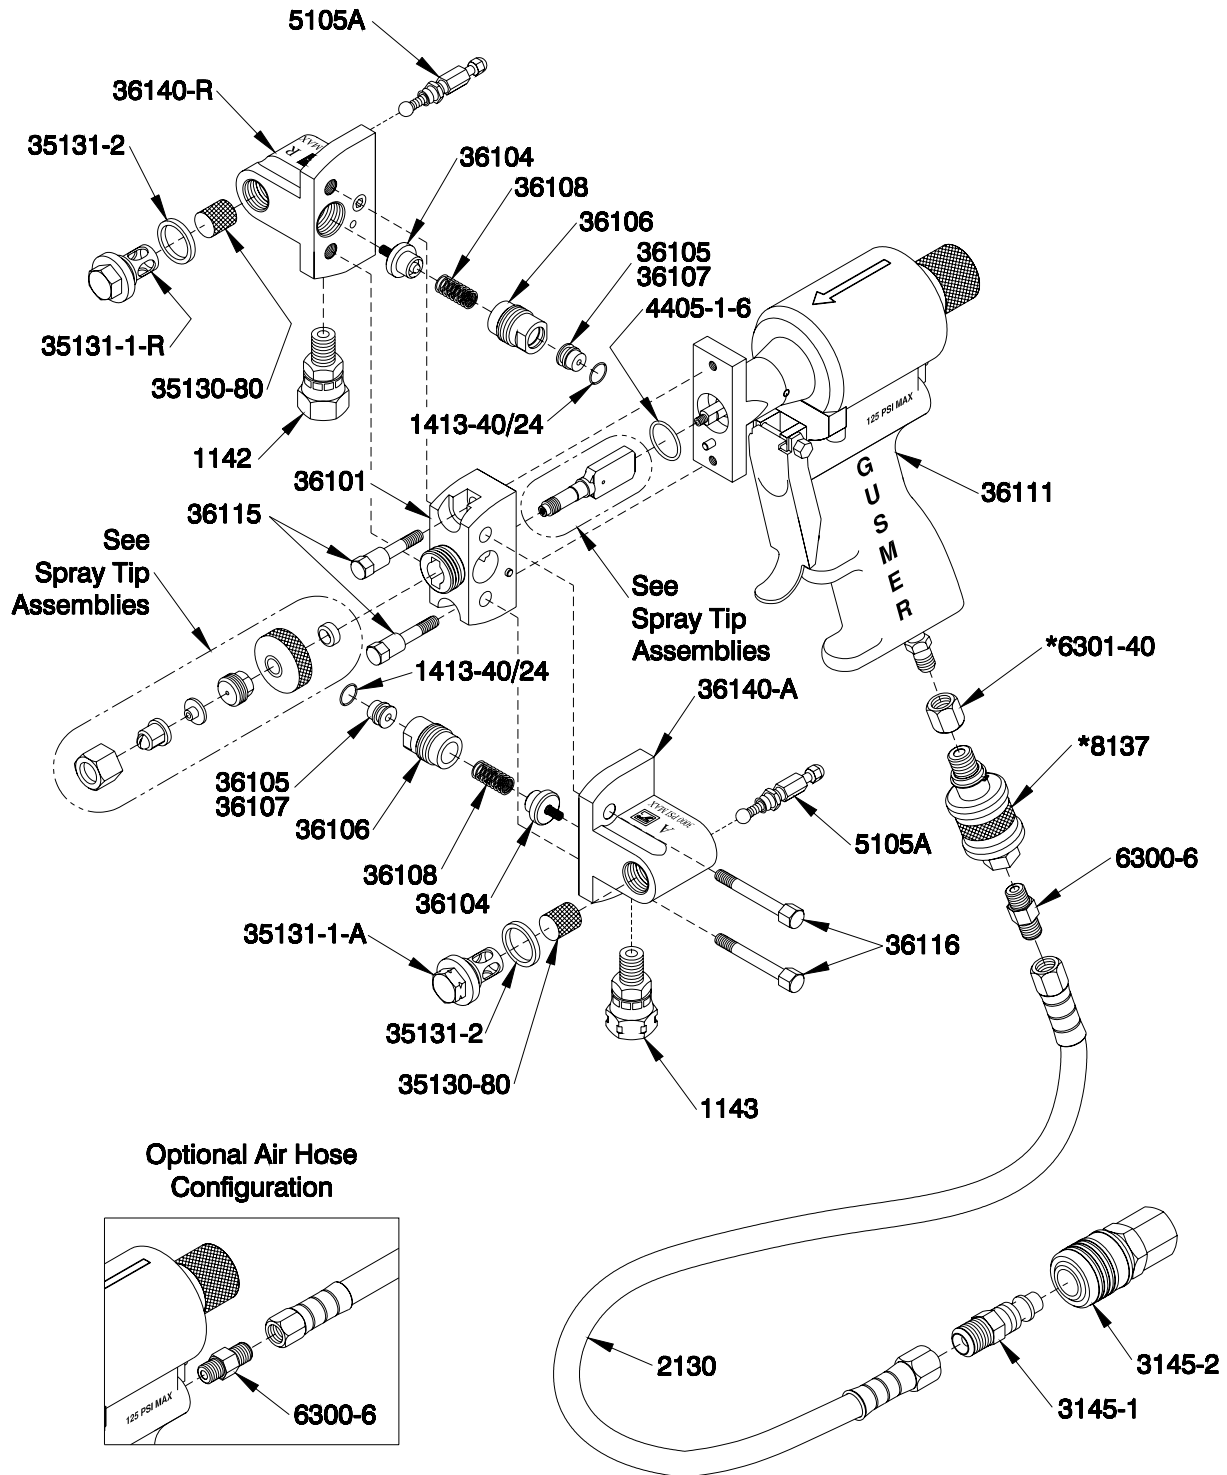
Final Assembly (Part No. 36100-SIZE), Exploded View
